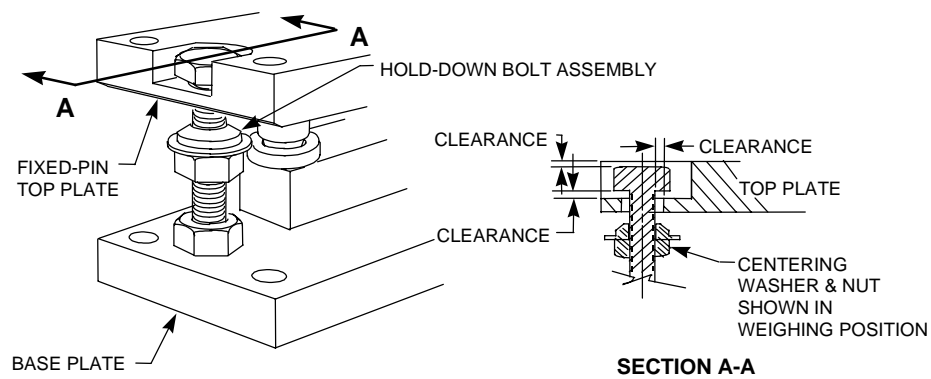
Flexmount Hold-Down Bolt Assembly
